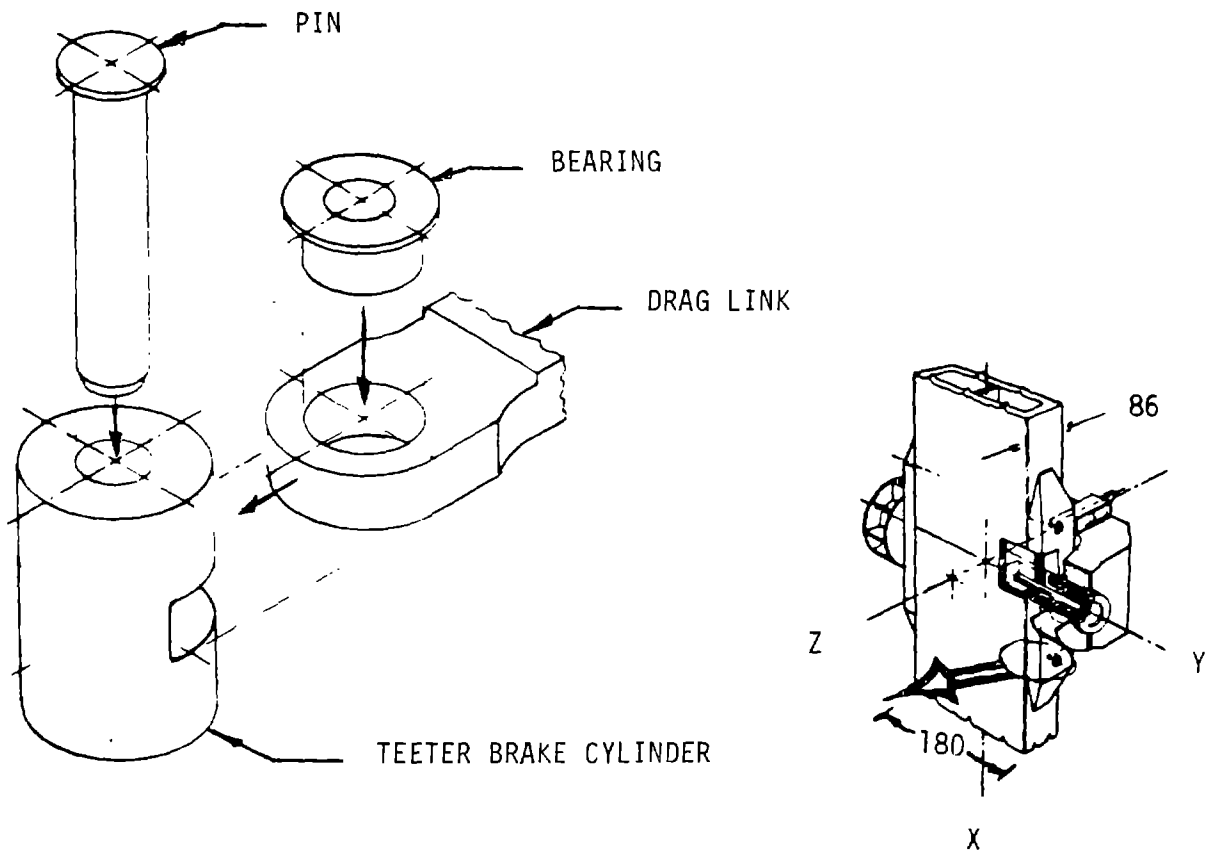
Model and Section Through the Brake Attachment Steel-to-Wood Fitting
